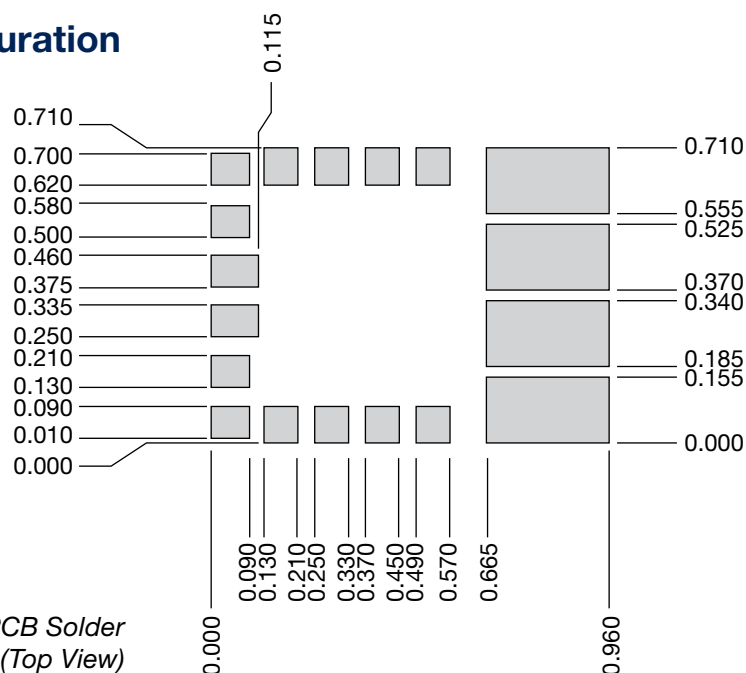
Recommended PCB Solder Pad Configuration (Top View)
